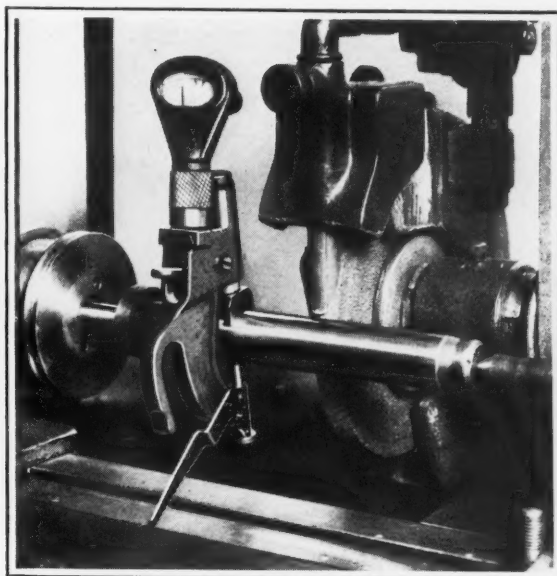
"Mikrotast" Gage Designed for Use in Cylindrical Grinding
